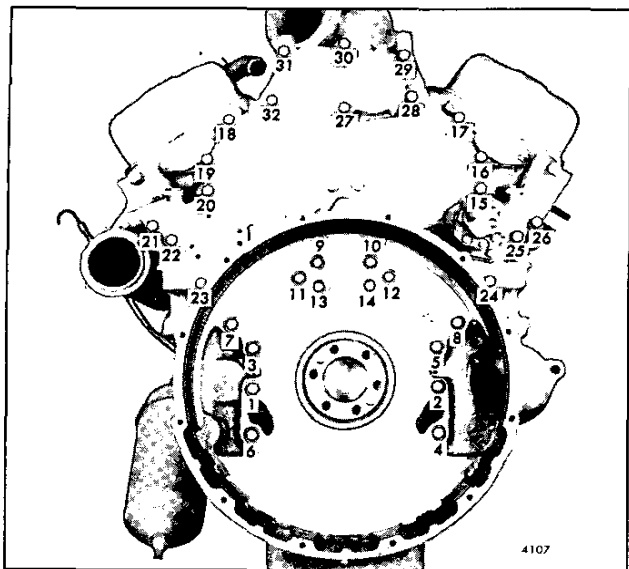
Flywheel Housing Bolt Tightening Sequence
